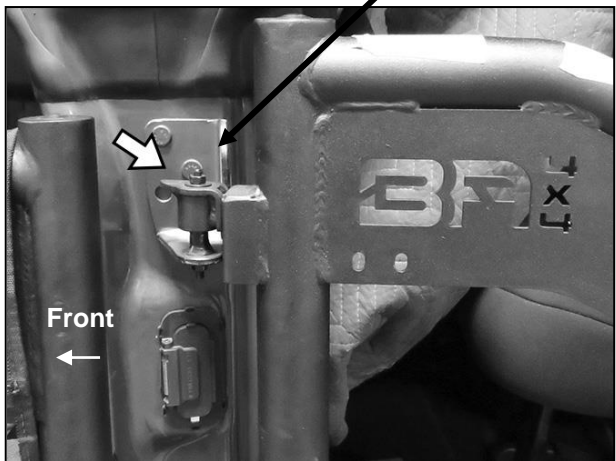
Lift door, guide upper and lower Mounting Brackets onto Hinge Pin and lower mounting post
